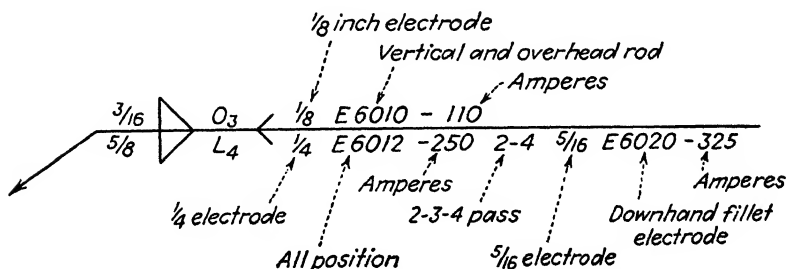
Type of electrode, size of electrode, and machine setting for each pass are "engineering" factors, each of which represents an important effect upon the cost or quality of welds. They may be designated on the print as here shown.
